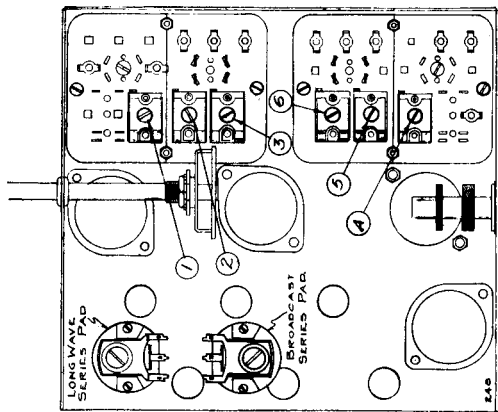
BOTTOM VIEW (Showing Trimmers)
